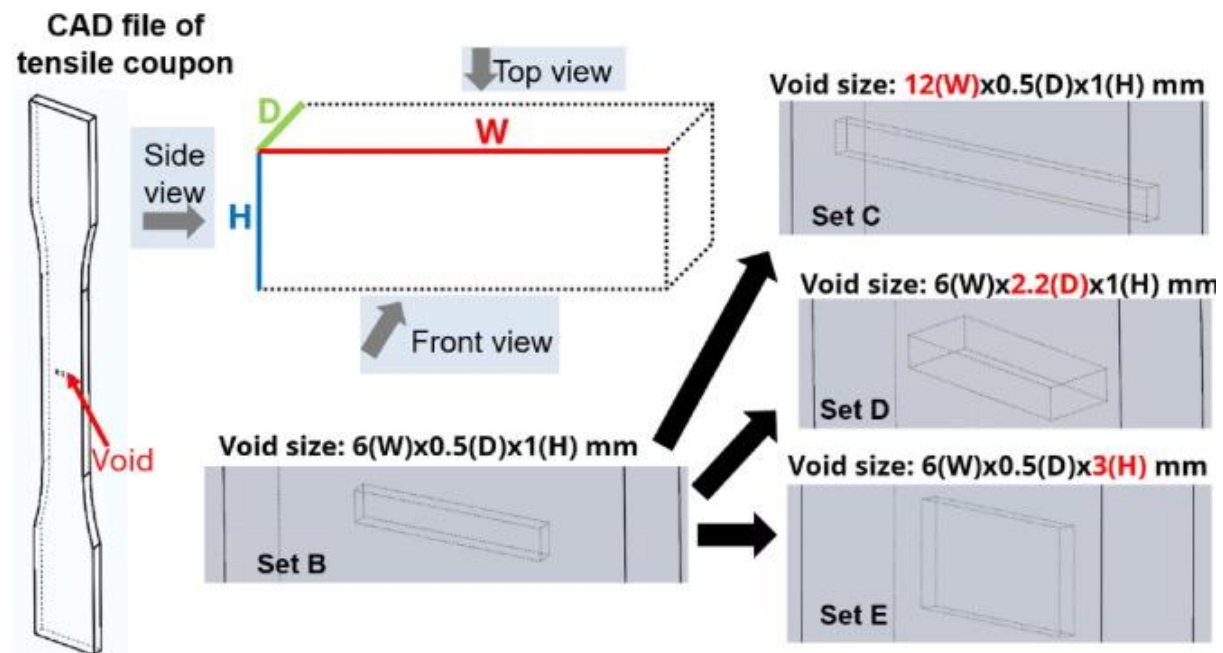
CAD file of defective tensile test coupons of Set B – Set E.
